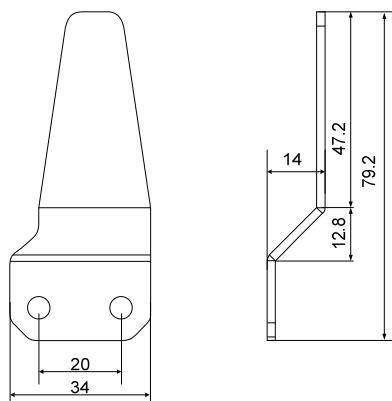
Dimensions of the Bracket (unit: mm)
